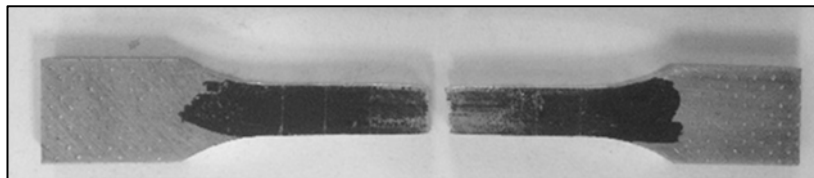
8 The macroscopic morphology of a weld after tensile fracture.
